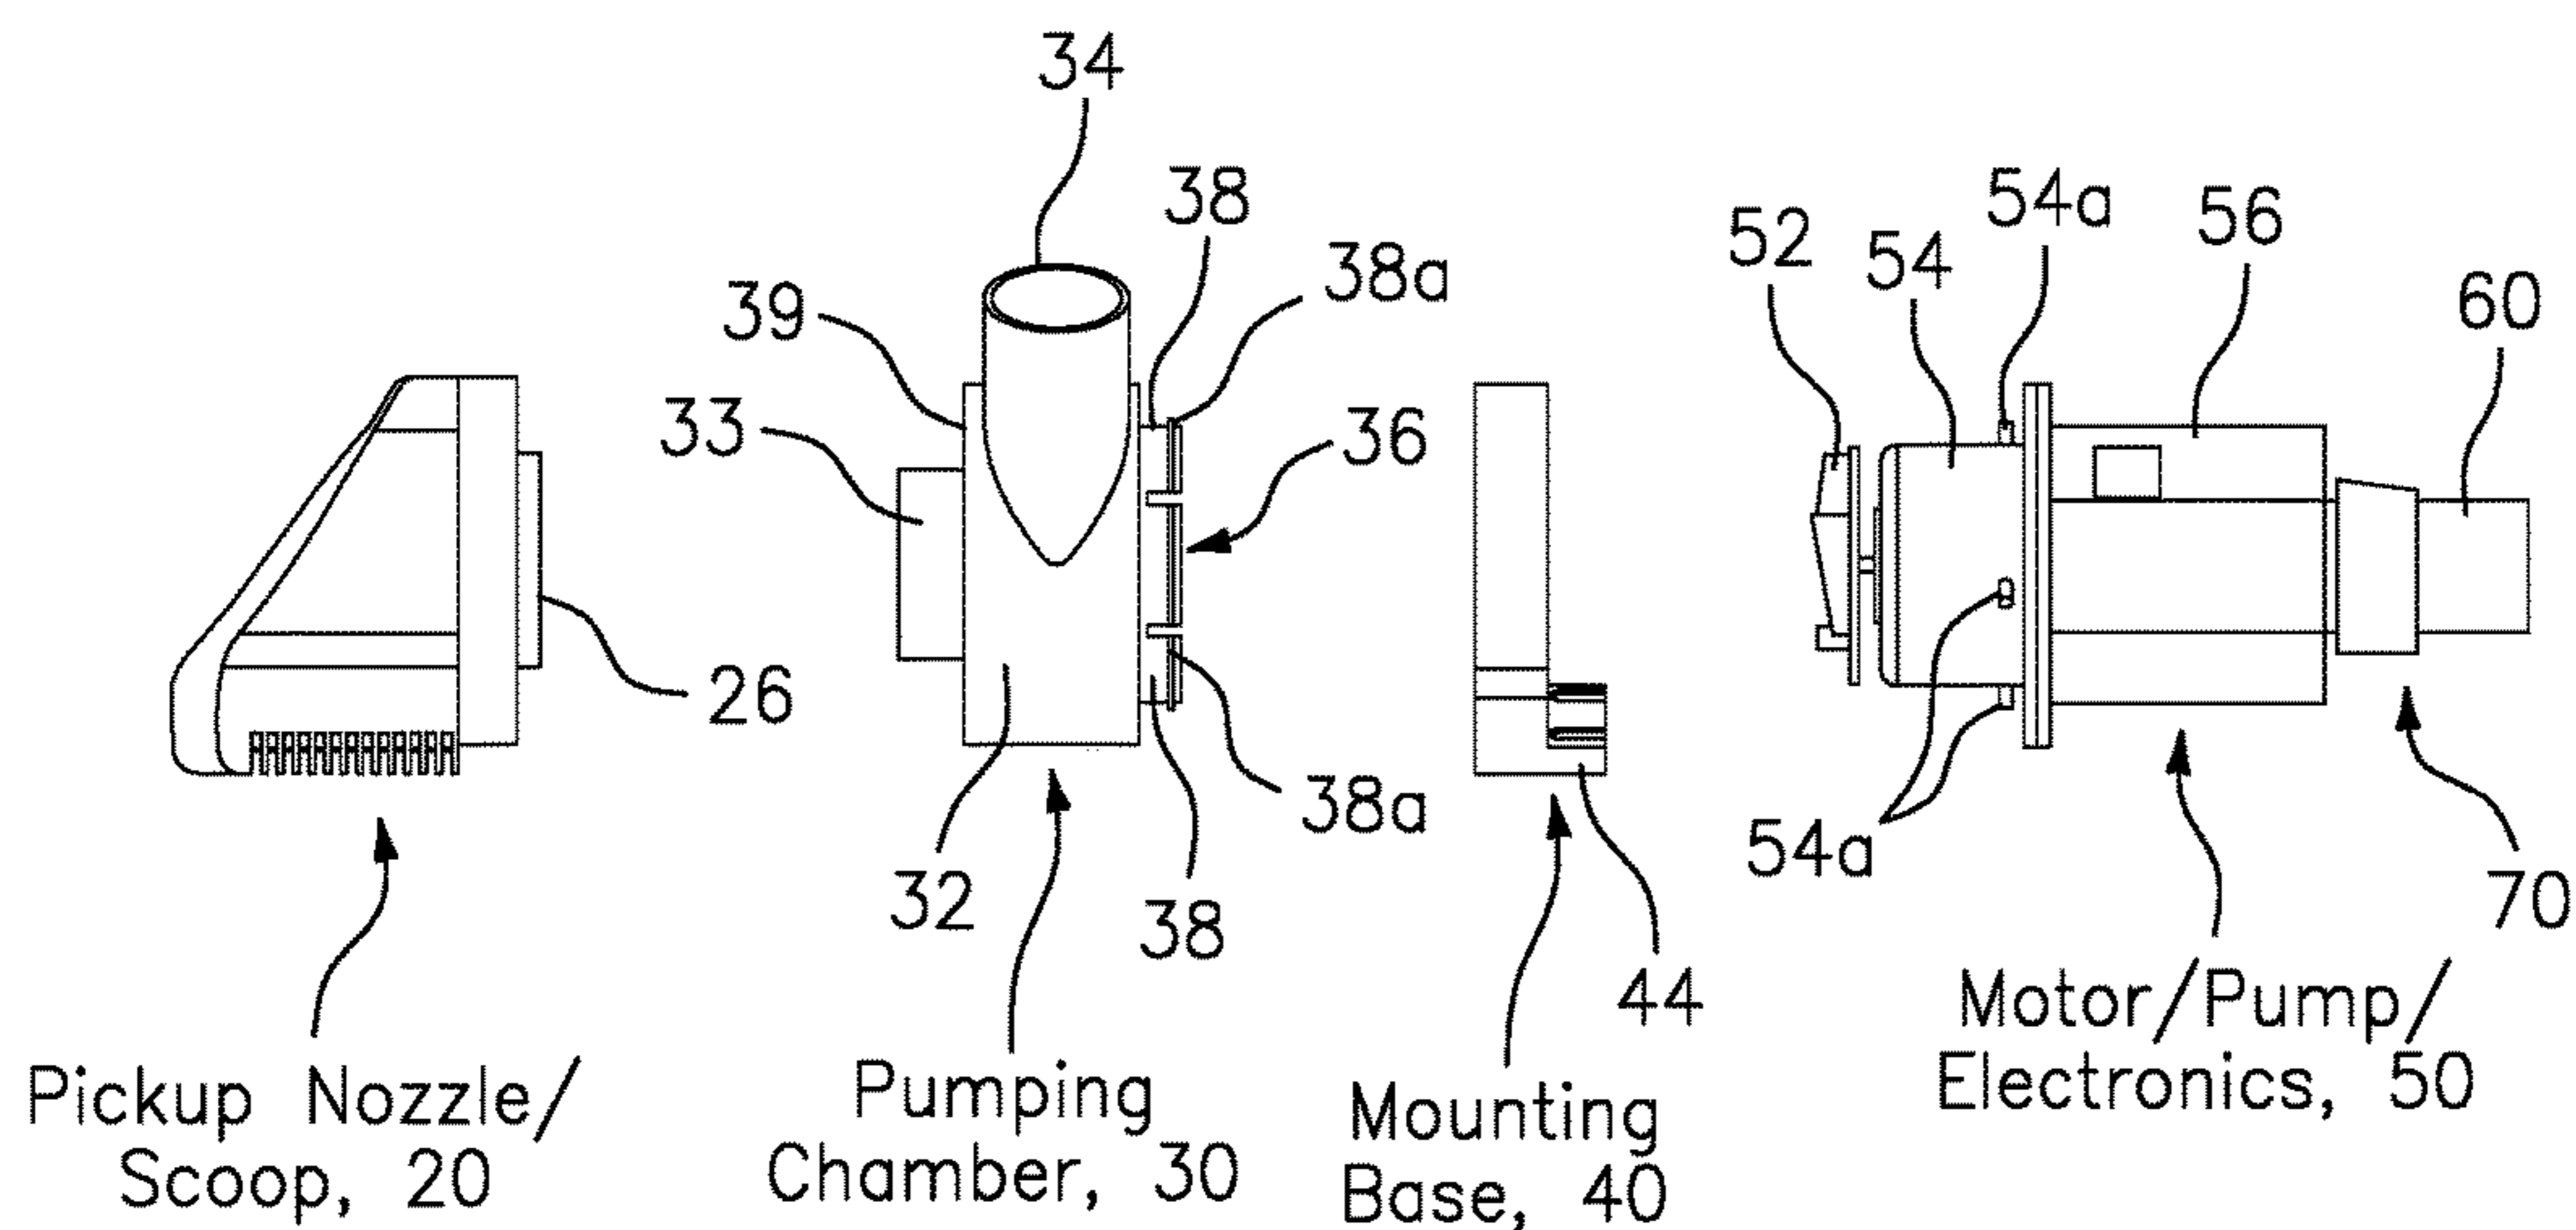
Exploded View of a Low Profile Pump having a Basic 4-Part Design
